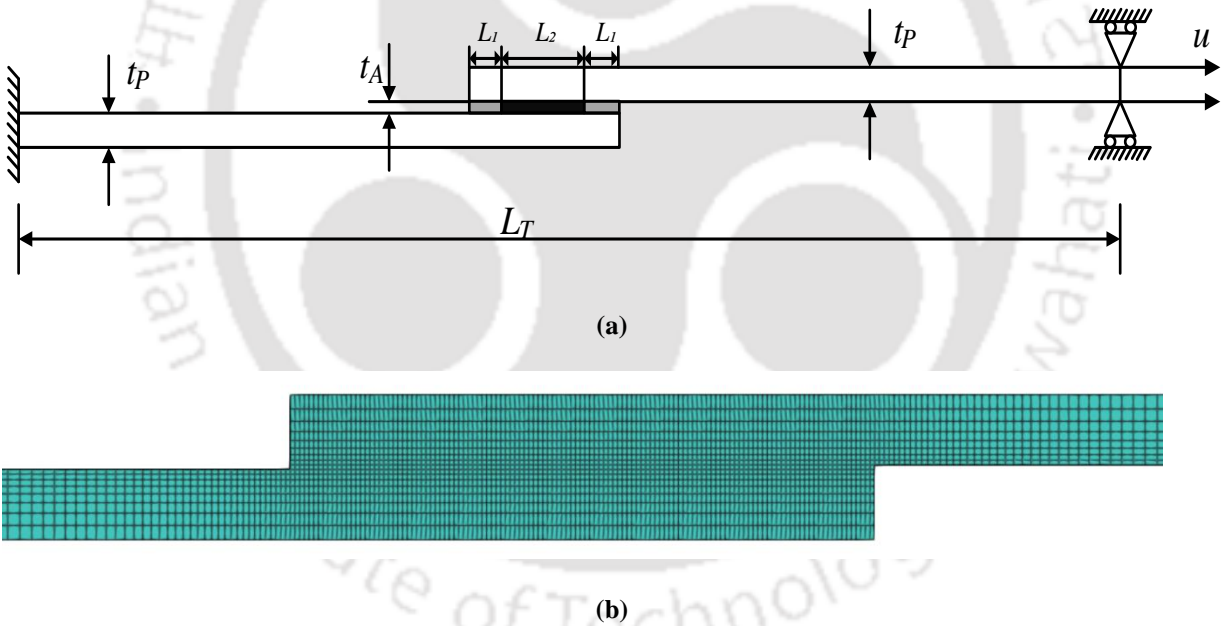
Biadhesive single-lap joint specimen: (a) geometry, dimensions, loading and boundary conditions, and (b) mesh (3773 elements)
